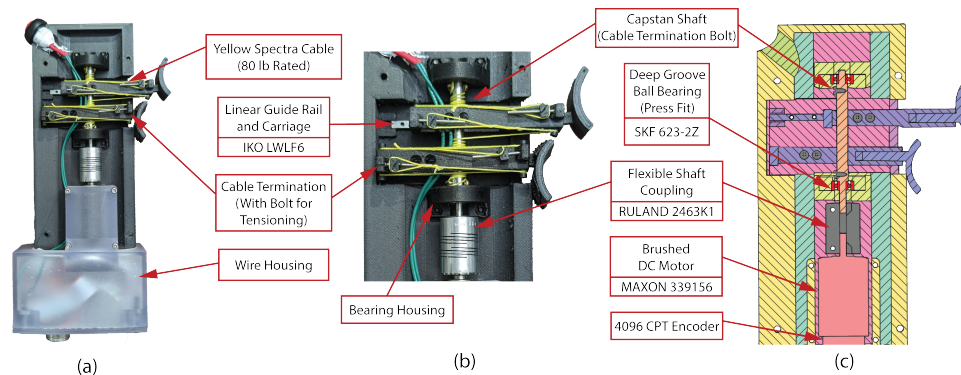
Internal (a) view, zoomed internal view (b), and cross-sectional view (c) of the device showcasing the drive-train and related design elements.
